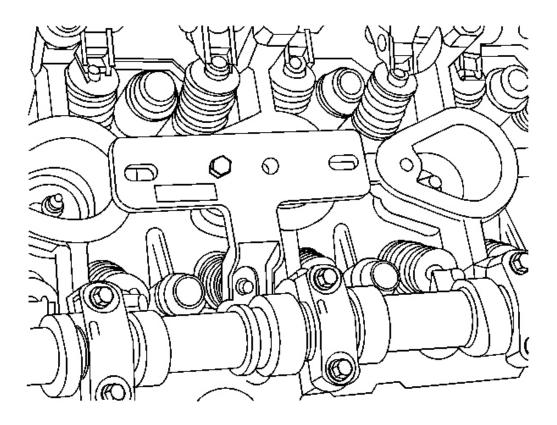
Compressing Valve Spring Courtesy of GENERAL MOTORS CORP.
